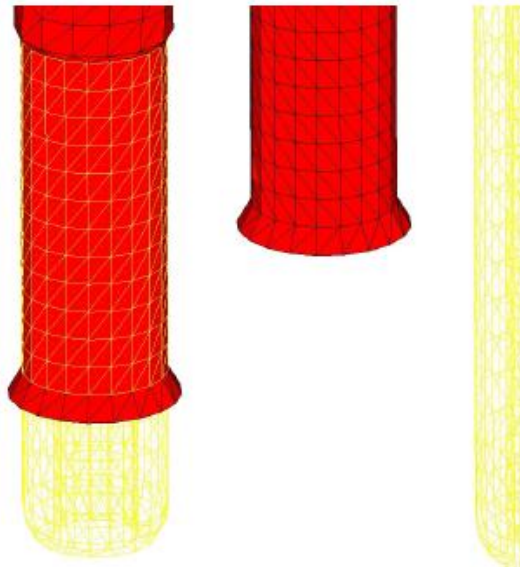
Valve guide models (mesh exactly meets with head mesh).
